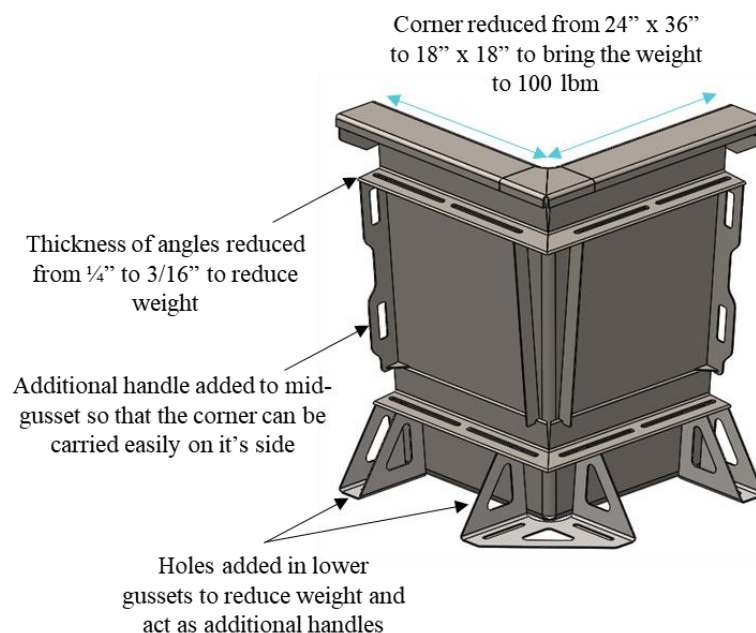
Assembly and ergonomics optimized corner weld assembly
